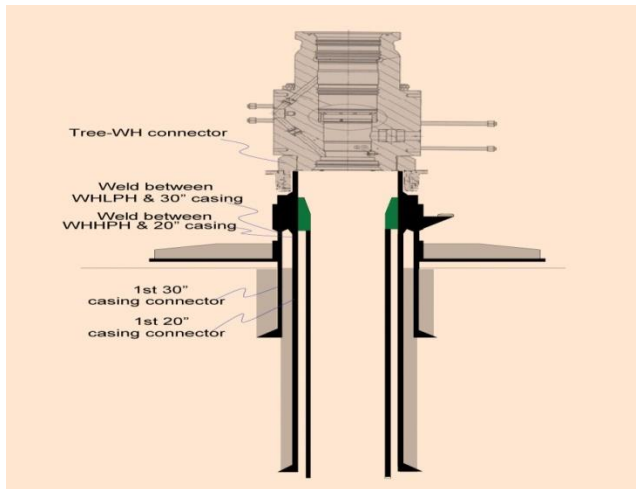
Typical General Arrangement of Wellhead-Conductor System with weld joints locations (www.drilling contractor.org)
